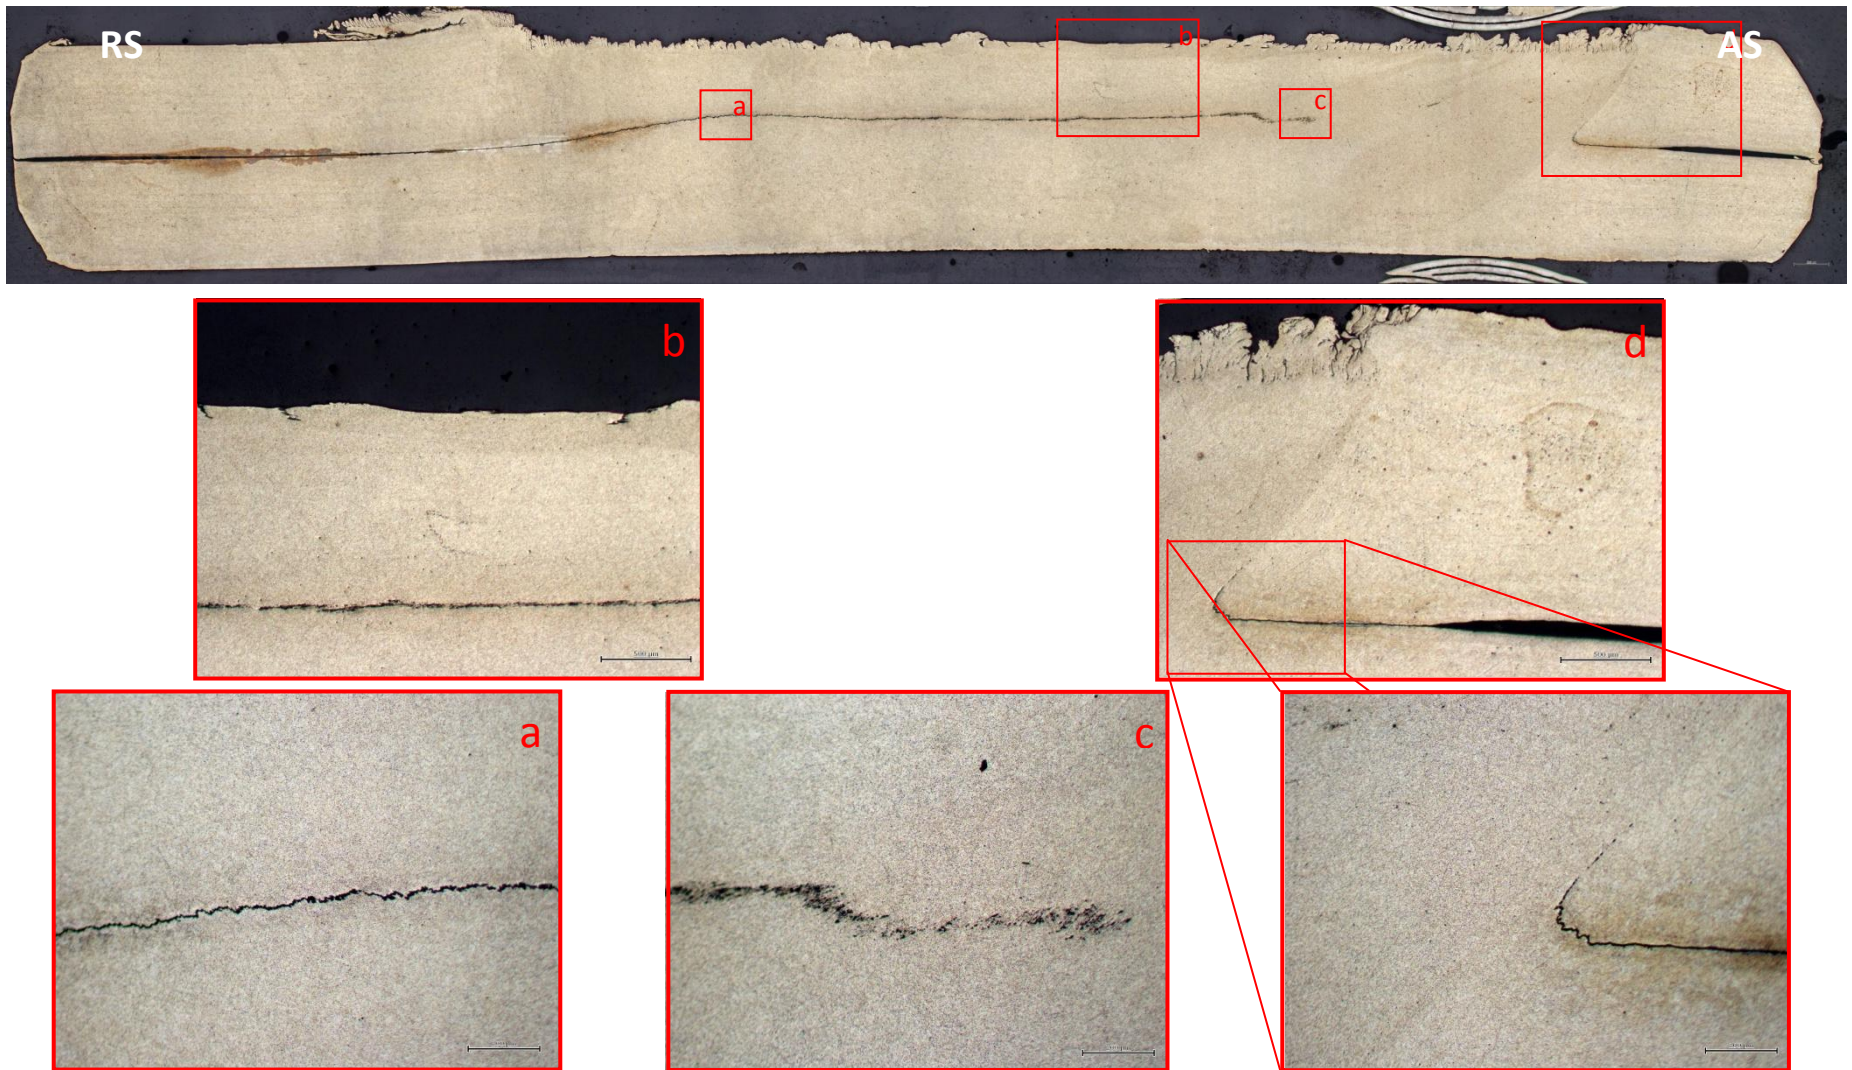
Cross section of aluminium lap jointed by FSW with -1.6 mm PD.
